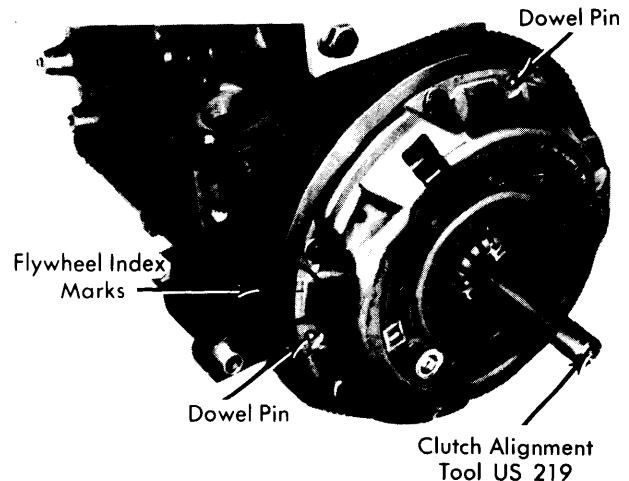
View Showing Clutch Assembly Alignment on Flywheel
